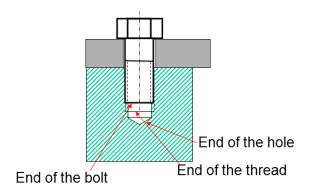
Parts shown in Figure 8-24 after assembly.
